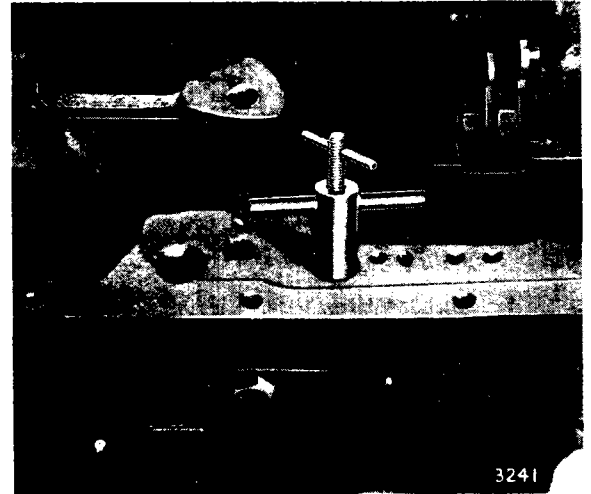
Removing the rear pump outlet tube (Extractor Tool Part No. CWG45)
